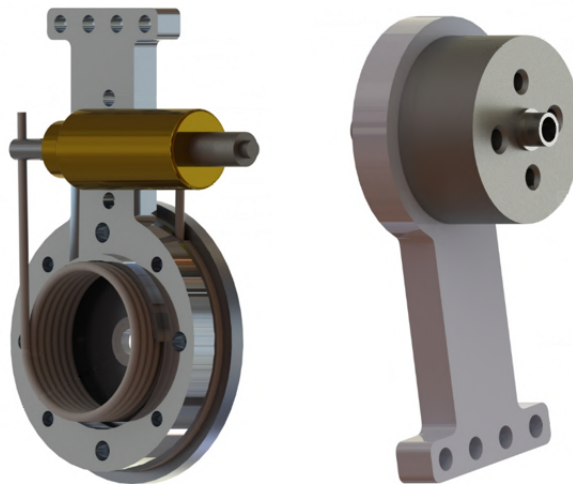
Capstan clutch knee joint [21]: The upper part of the joint with the wrap-spring (left), and the lower part of the joint (right). A solenoid actuator can tension the wrap-spring and thereby grab the lower part of the joint.
